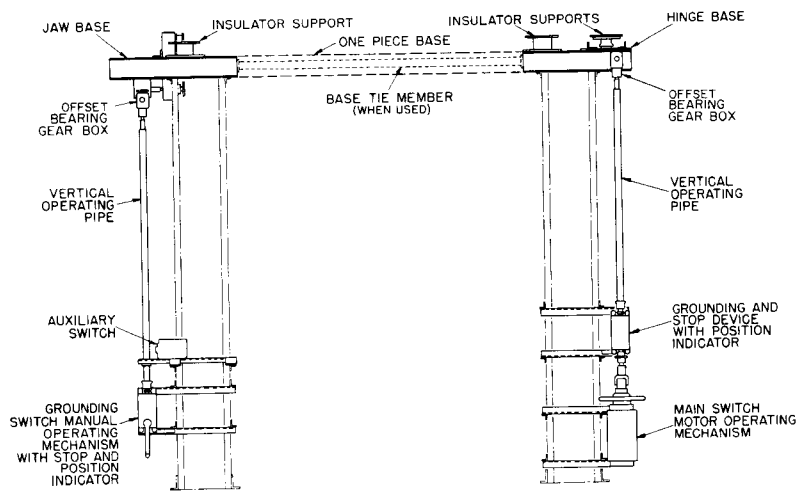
Sectional view of a 500-kV vertical-break switch installation
